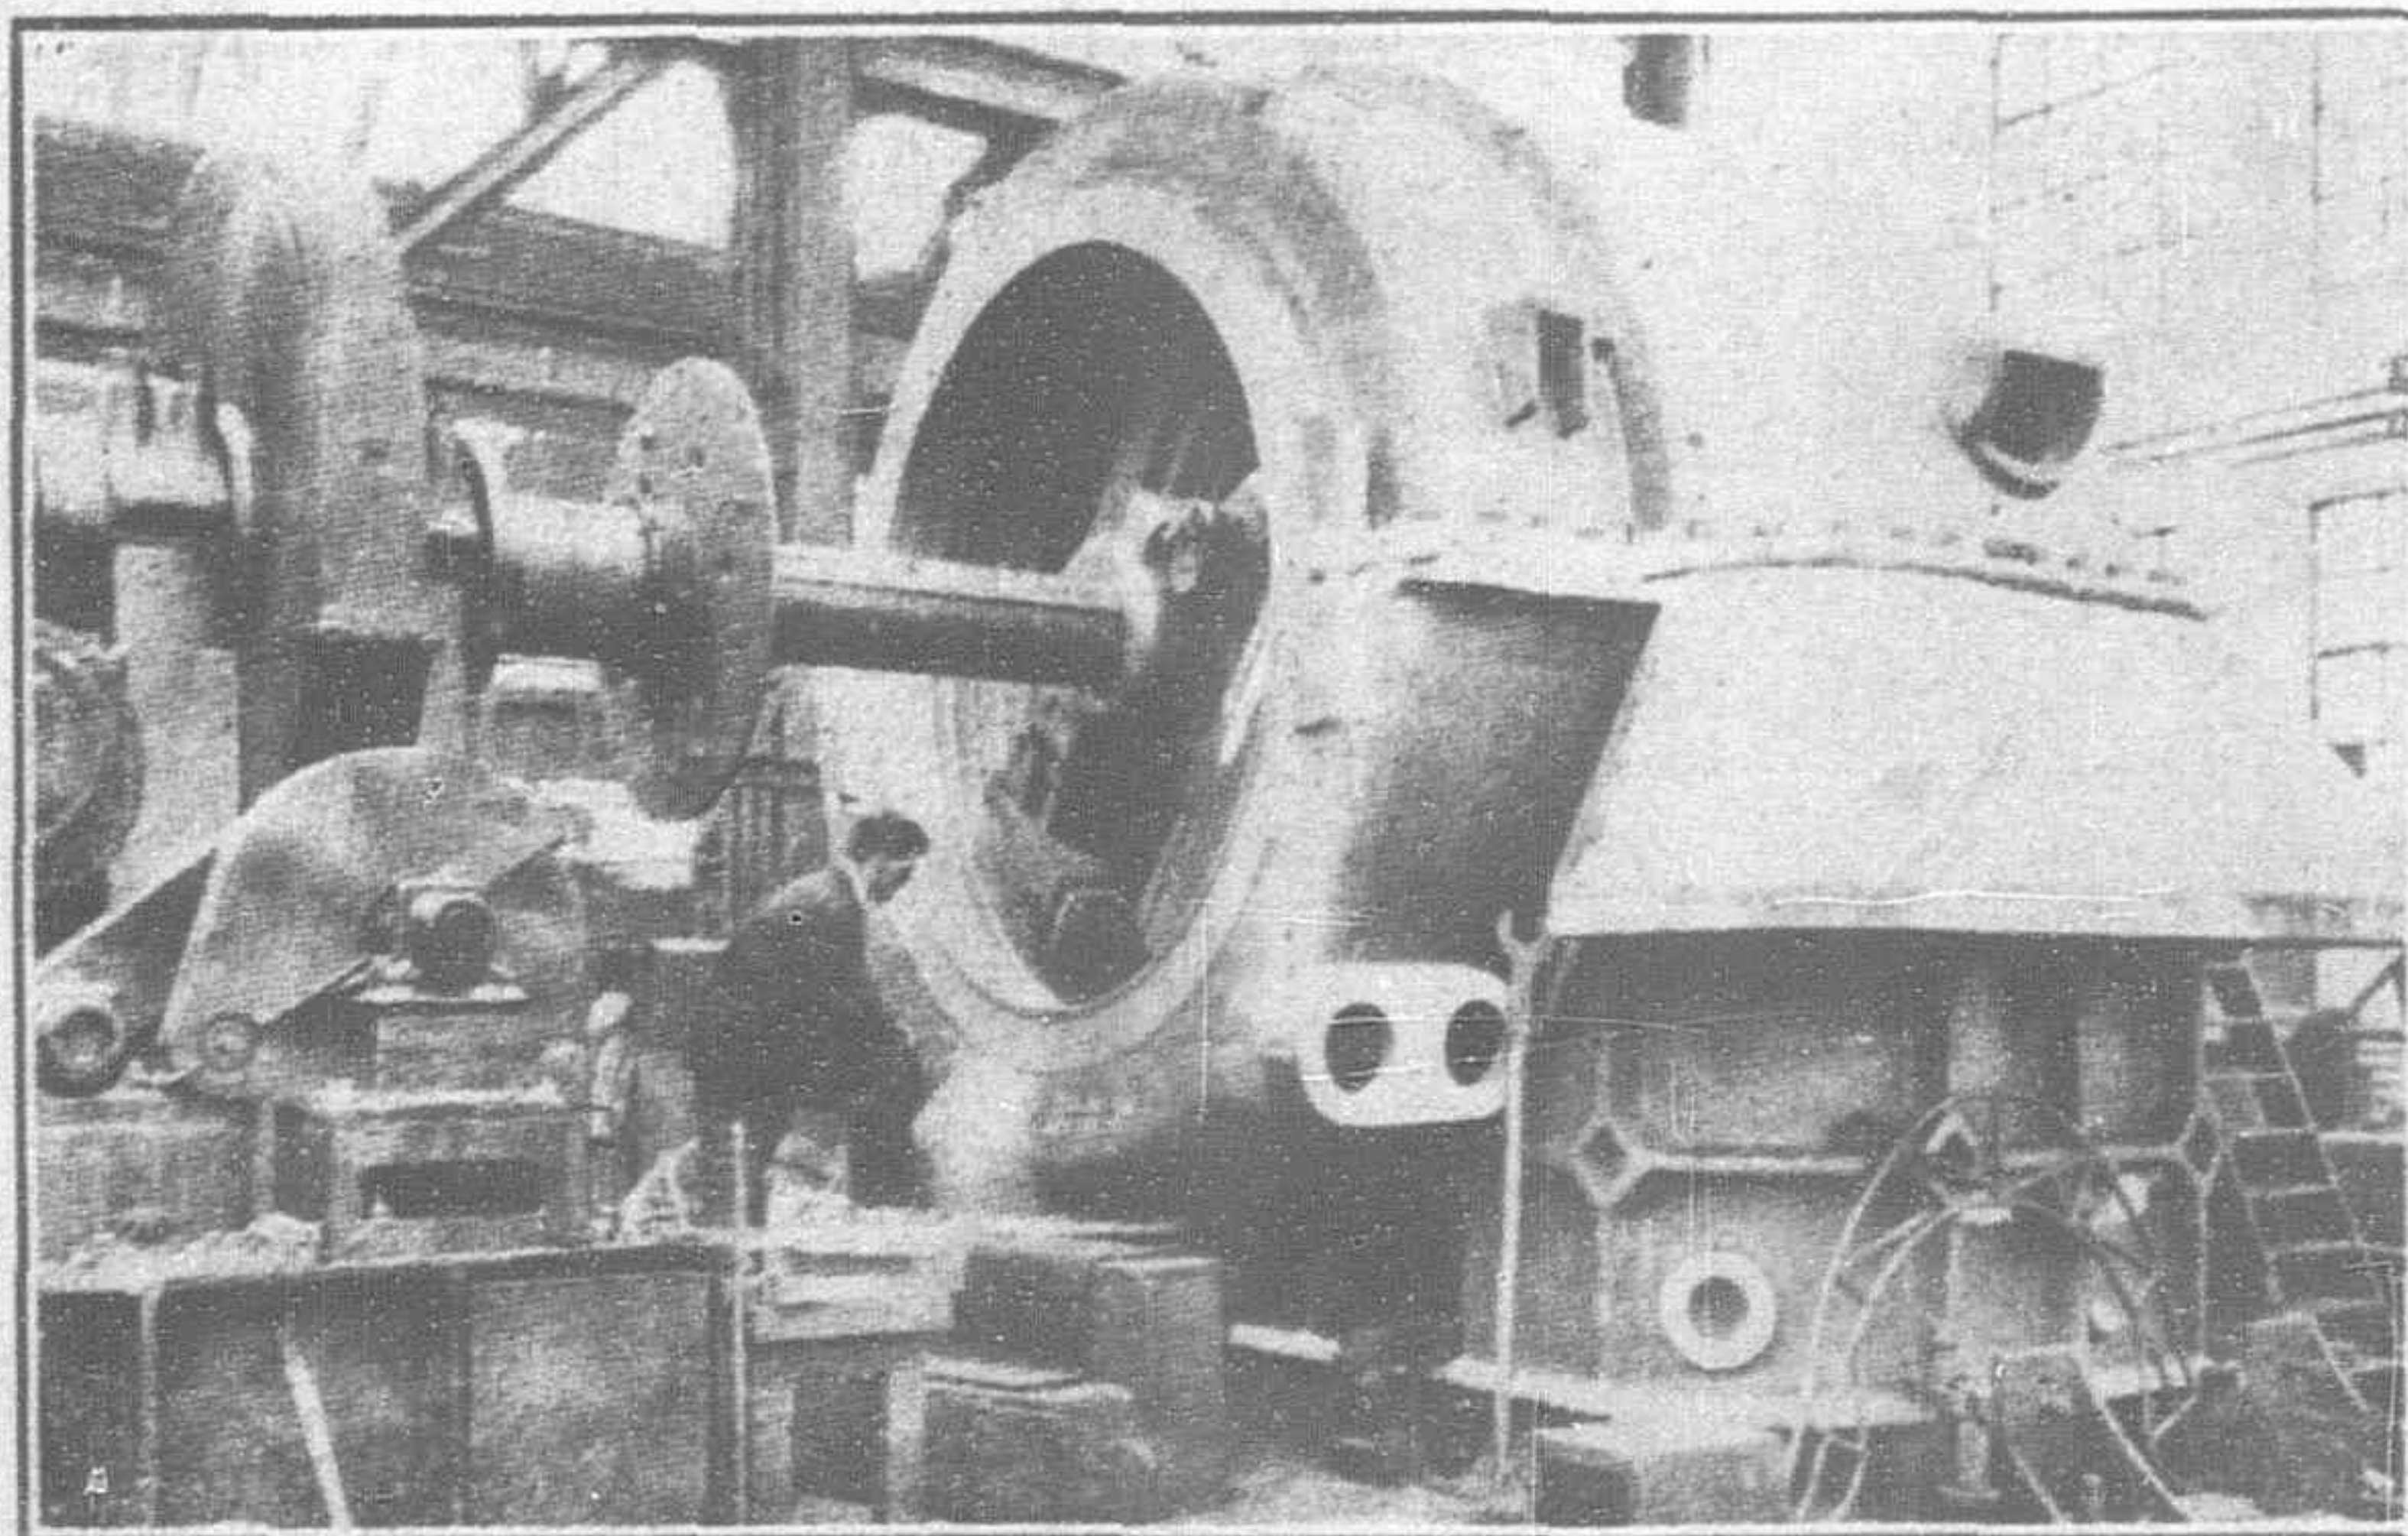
The Rotor of the 20,000, B.T.H. kw. Turbo-Alternator
